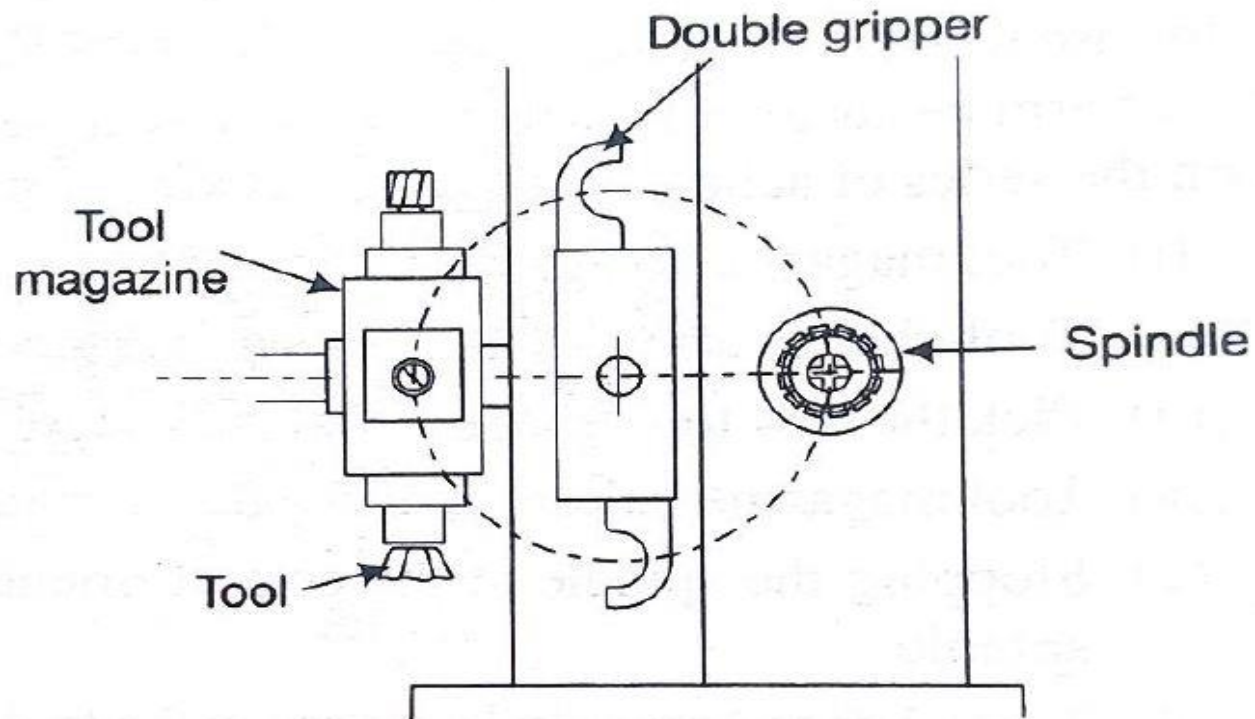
One common type of tool-change arm used for tool changing with a double gripper
